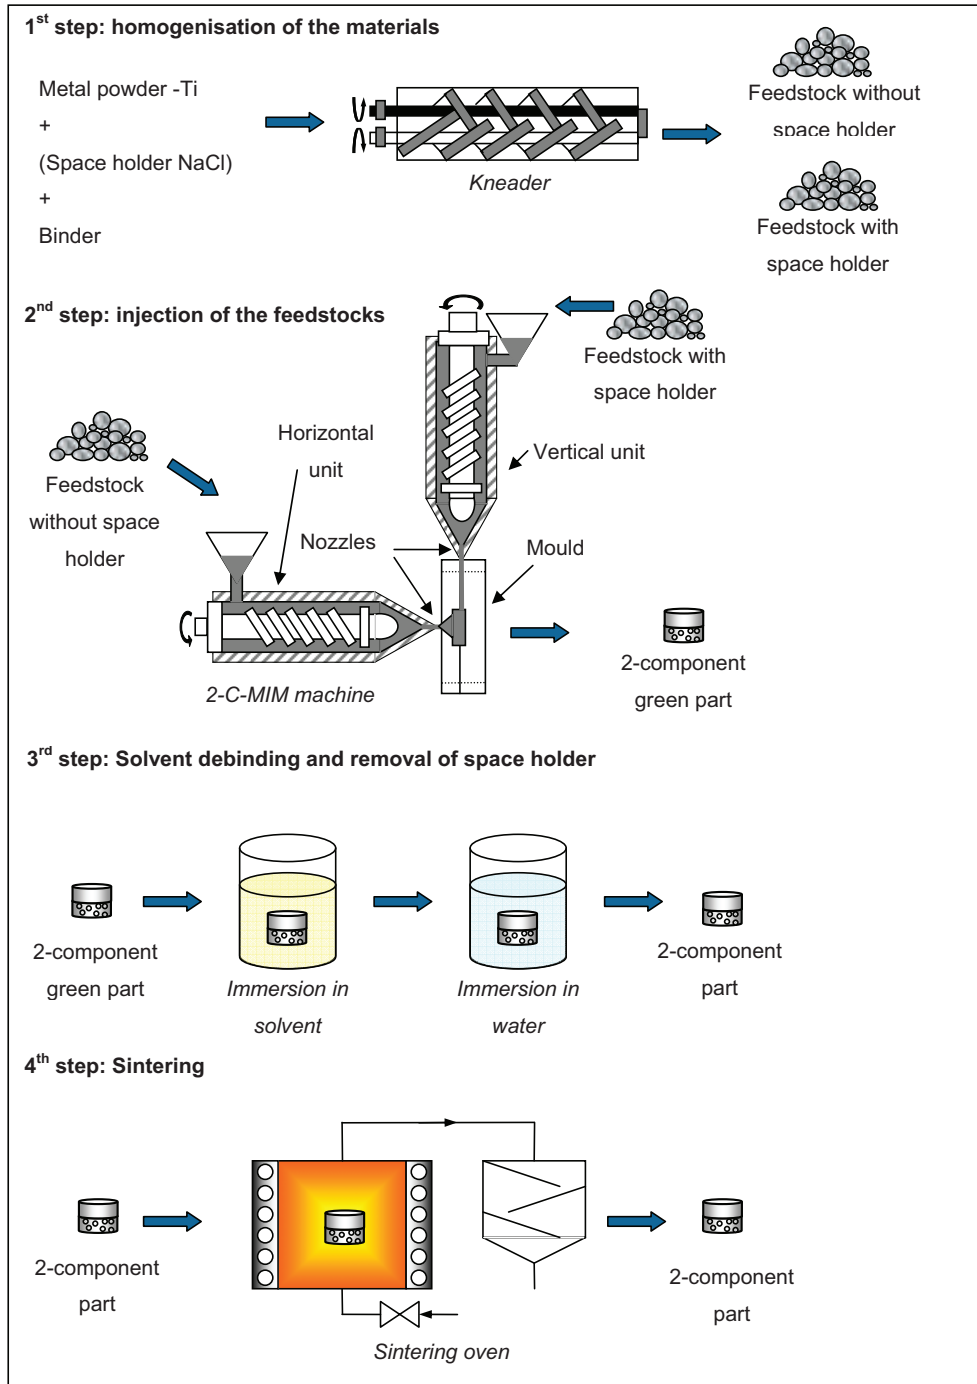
Schematic drawing of the 2-C-MIM process in combination with the space holder method.
